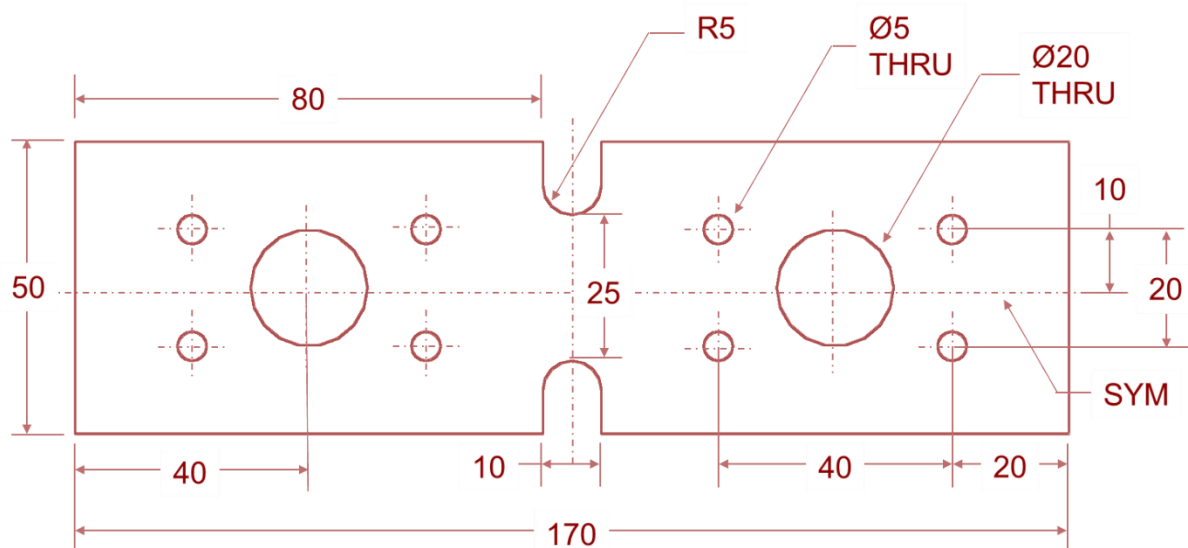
Improved waisted tensile test specimen geometry based on EN 12814-7 and WIS 4-32-08
